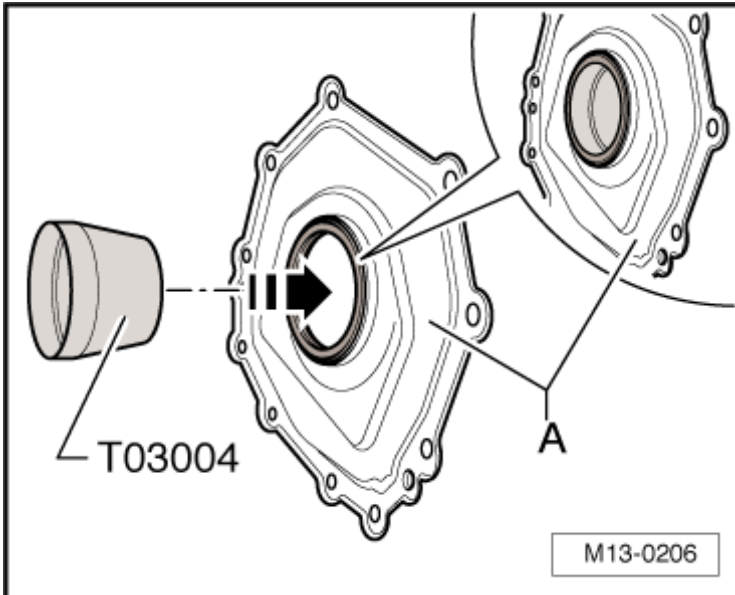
Identifying Sealing Lip Of New Sealing Flange Widened Using Assembly Sleeve T03004
